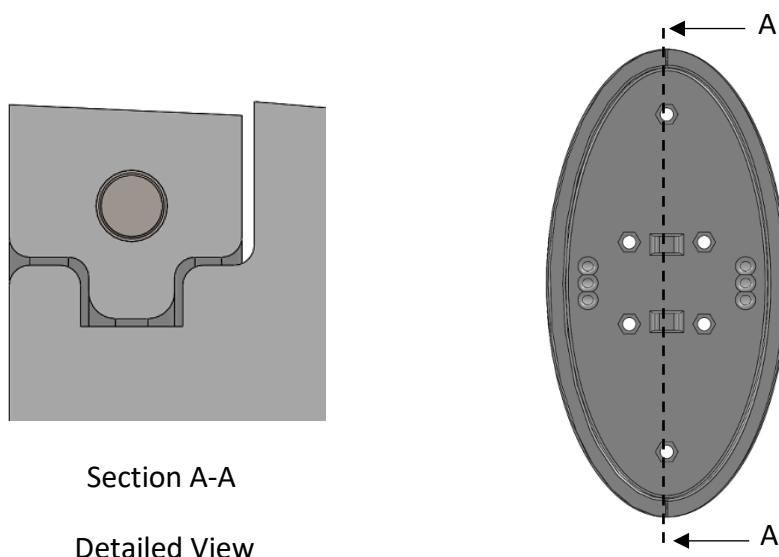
Detailed Section View demonstrating the geometry of the Head End Clamp
